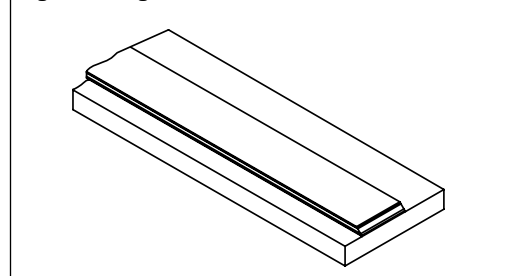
Magnetic tape screwed to the front side of the mounting bed
